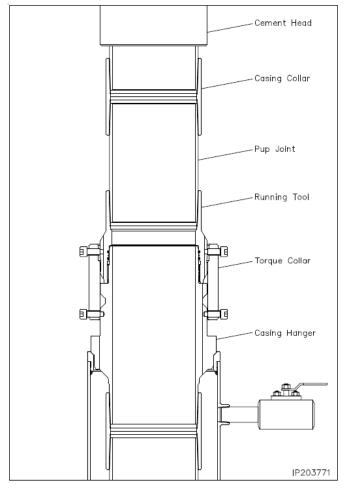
Cactus 13 3/8" 5M offline cementing tool. Pressure rating limited by the lesser of 5M tool rating or the 13 3/8" pup joint and casing.
